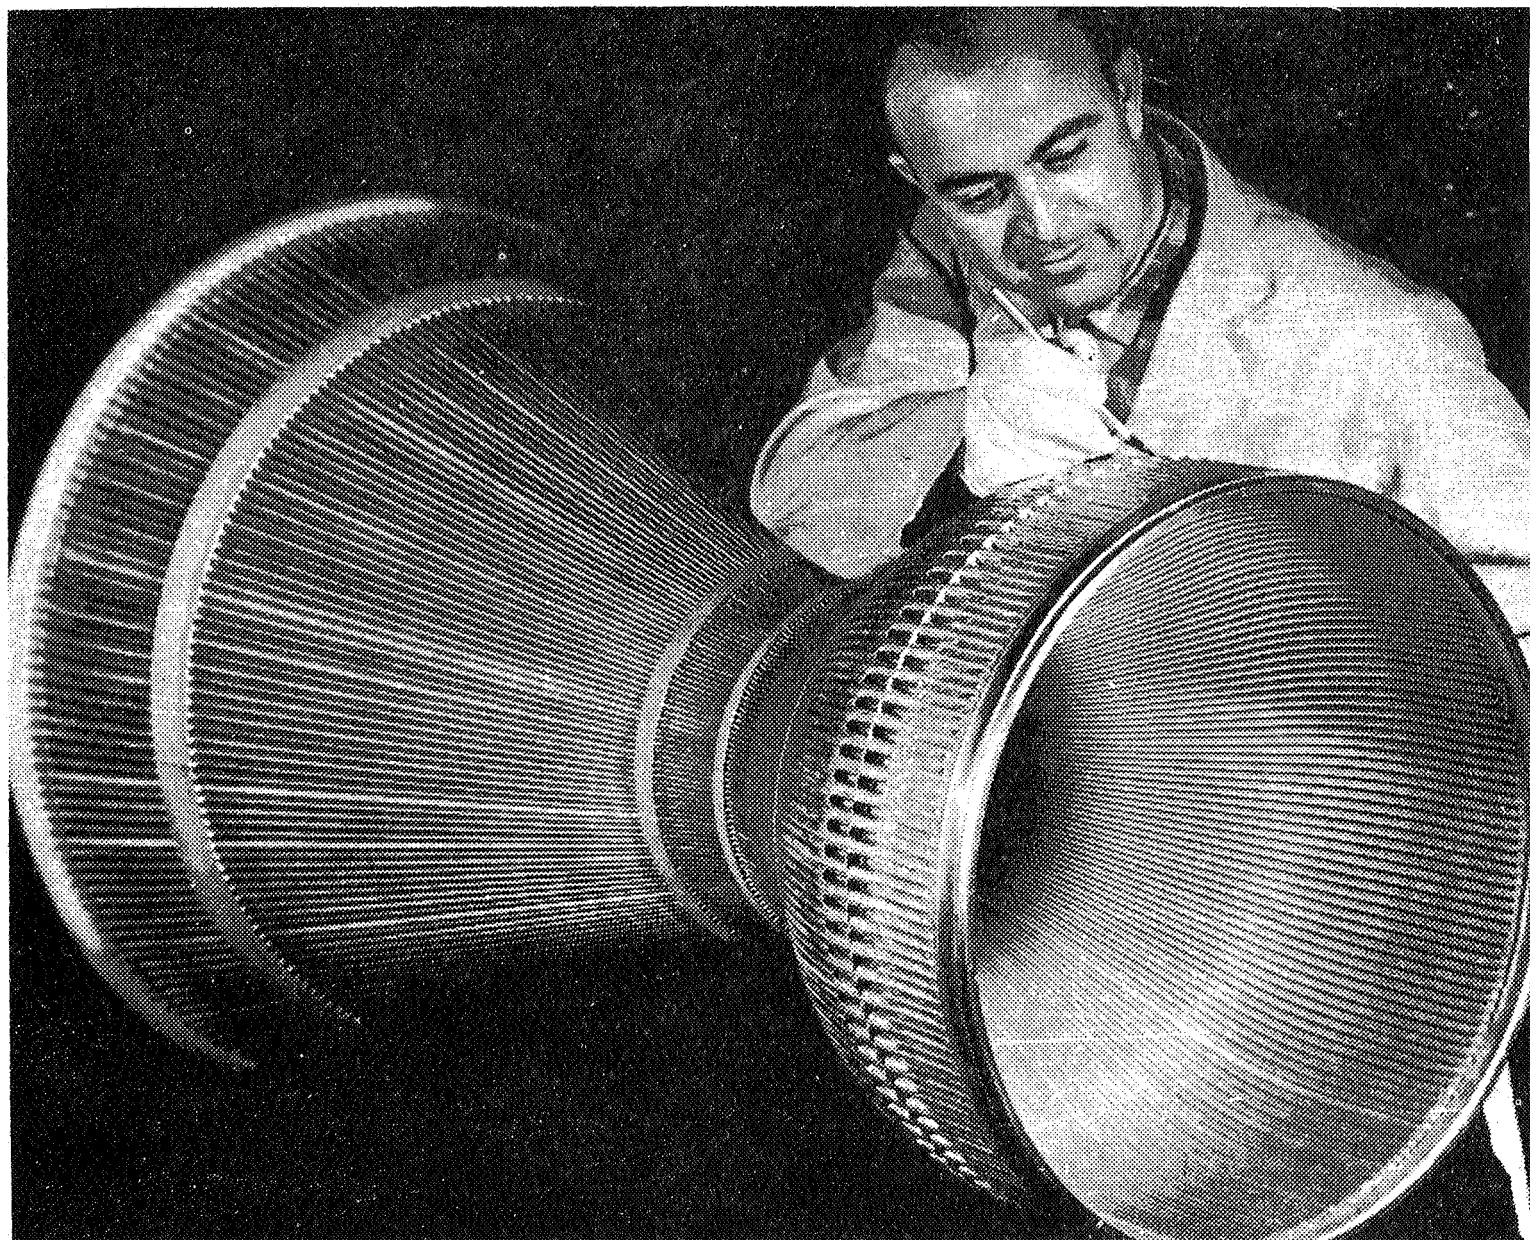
BRAZED ROCKET MOTOR THRUST CHAMBER OF
